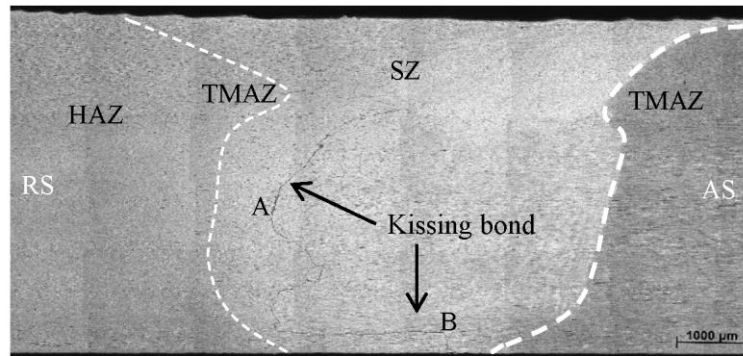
The weld zones macrostructure of the AA5083 FSW weld. ($\omega=1000\text{rpm}$, $v=300\text{mm/min}$).
